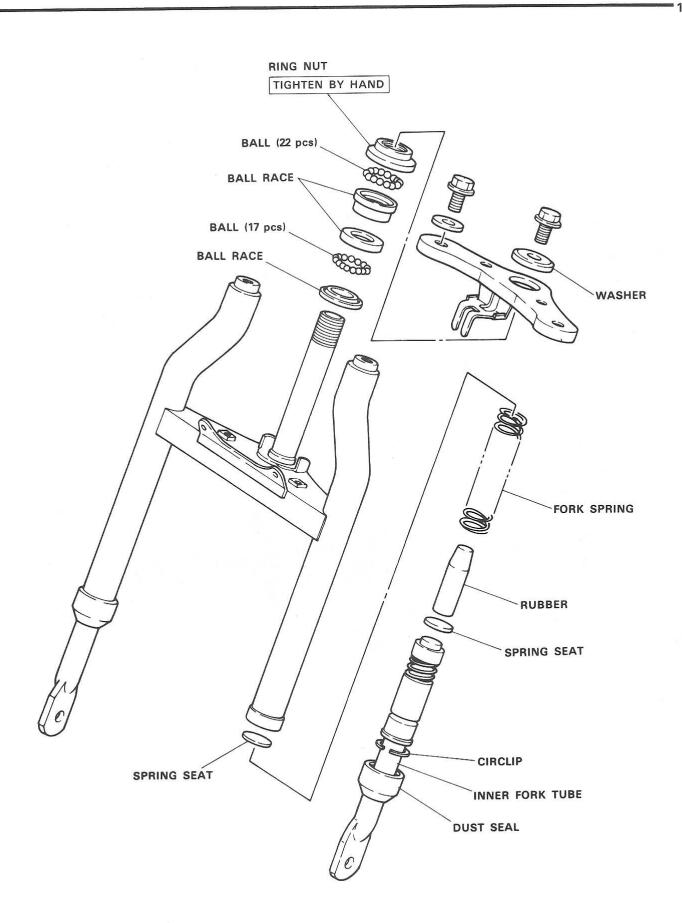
YT 60 fork components - exploded view (YT 125 models similar) (Sec 5)
